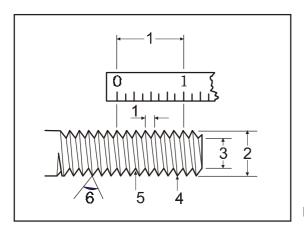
The parts of a thread KISERVICEBIUSAISB1041MVO
